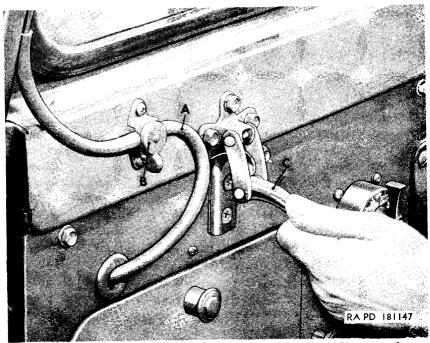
Disconnecting windshield wiper hose from windshield wiper and regulating value.
